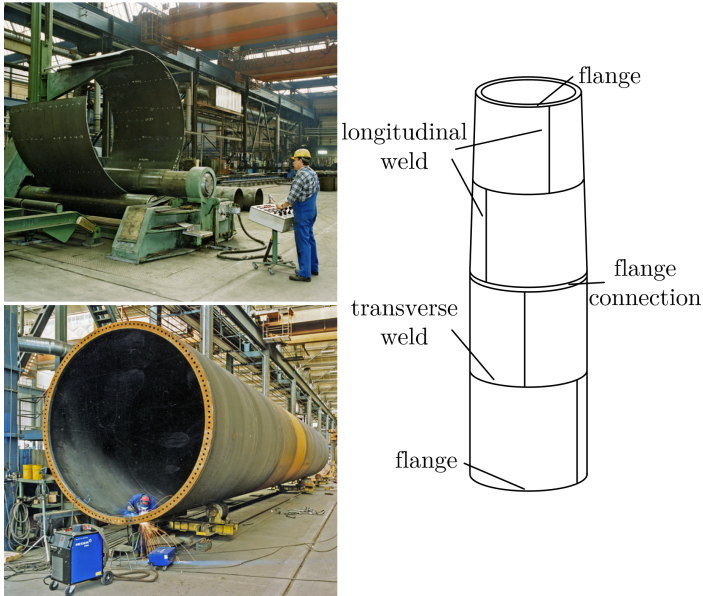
Manufacturing of conventional tubular steel towers on the left [93] and the welding scheme of two pipe sections on the right
